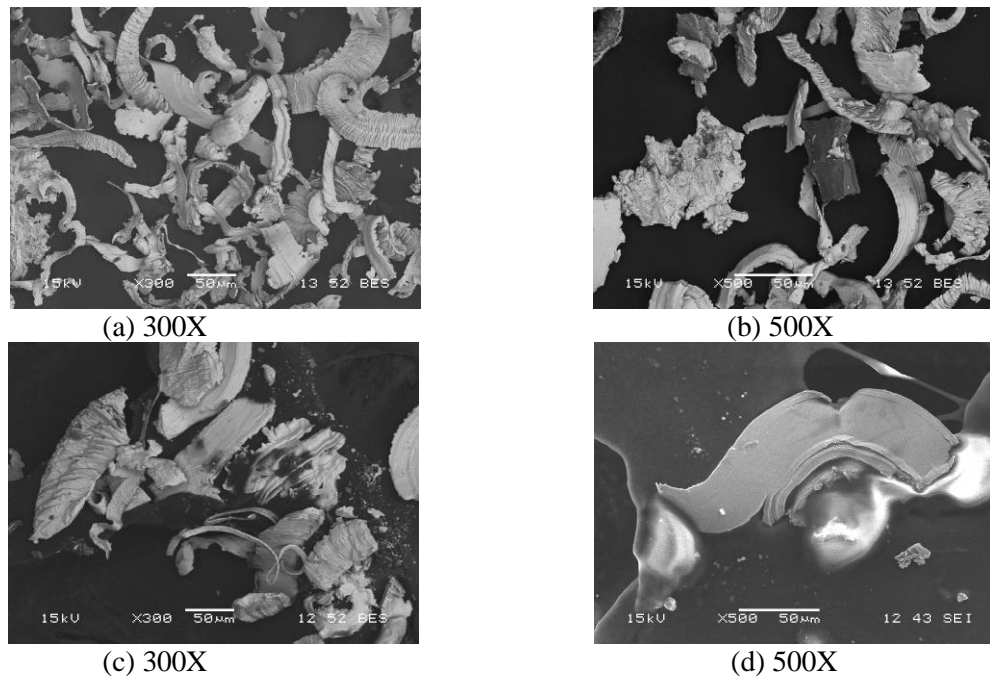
Debris morphology: (a)-(b) removed by Al_2O_3 wheel; (c)-(d) removed by CBN wheel
